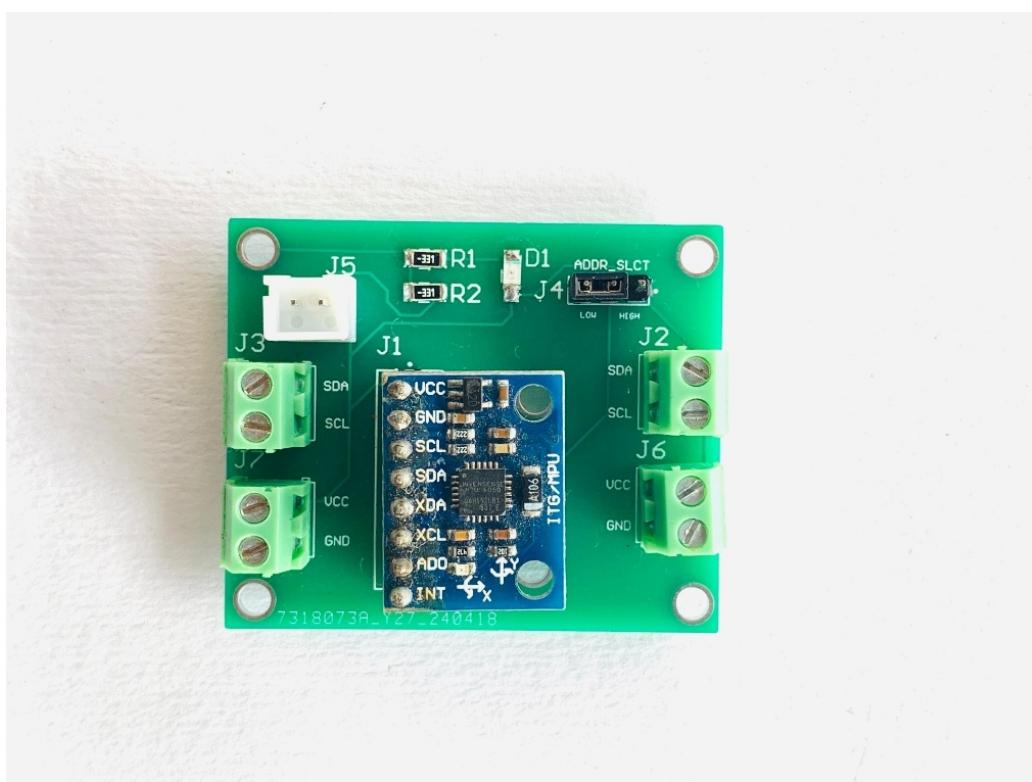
Soldered Sensor Module PCB - Top (MPU6050 Sensor attached)
